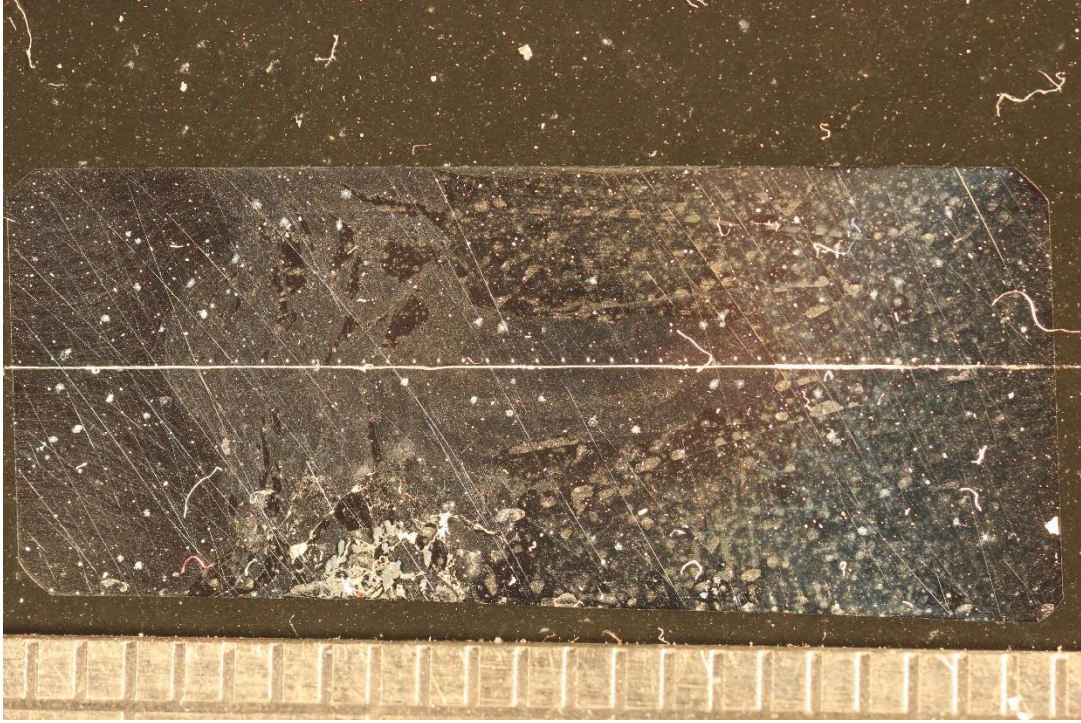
Macrograph of Weld 6 Sample 9
